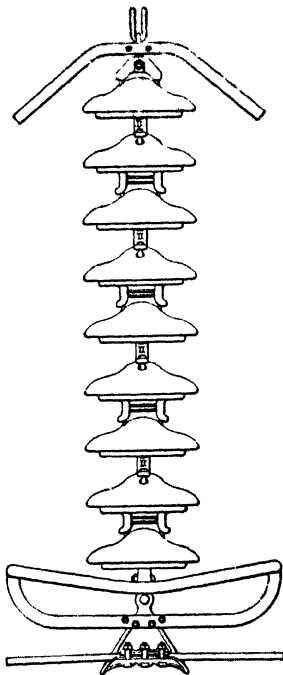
Hewlett type suspension insulator with arcing horns and grading shield.
